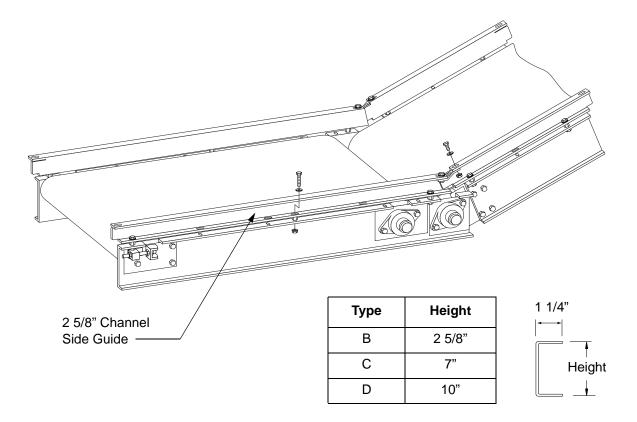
Power Feeder, Inclined, with 2 5/8" Channel Side Guides; Spaced Mounting
